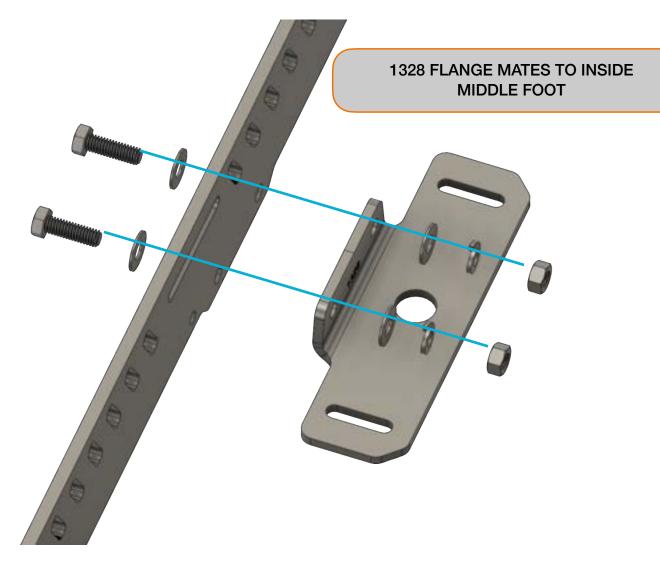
1328 Foot Driver Side (1041) Shown MIDDLE Location
